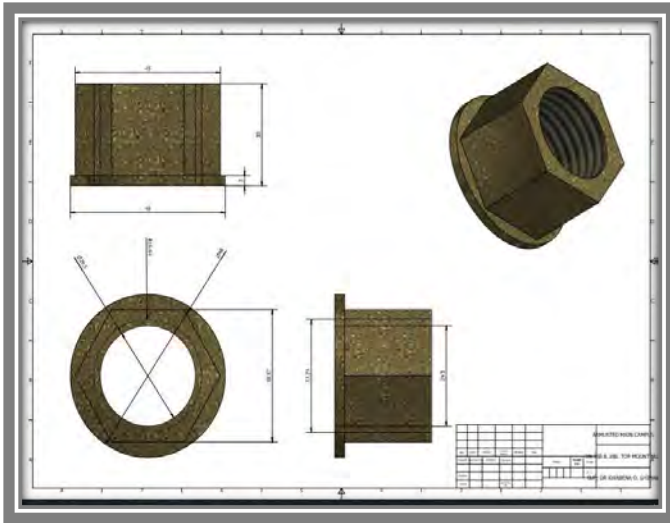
, SN 35B & 38B: Top Mount Nut, for Pushing Pistons & Moving Wheel Post
